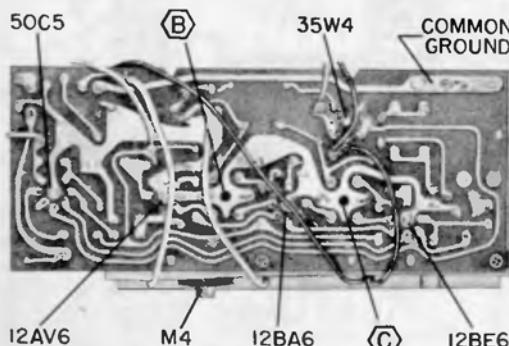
Bottom View of 5D4 Chassis Showing Alignment Points and Tube Locations. 5B4 chassis has same location for tubes and alignment points. Common ground is also the same.
